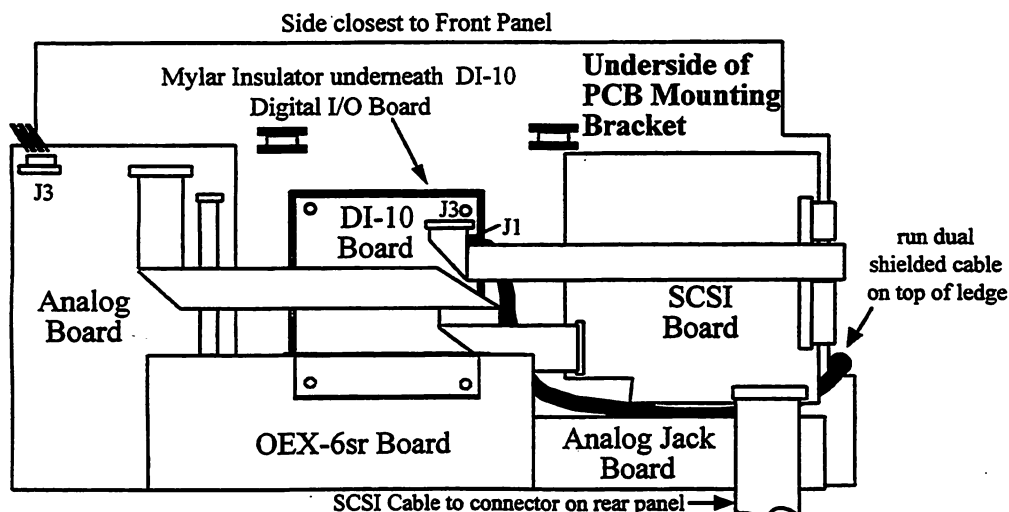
Installing a DI-10 Board into an ASR-10 Rack Unit
